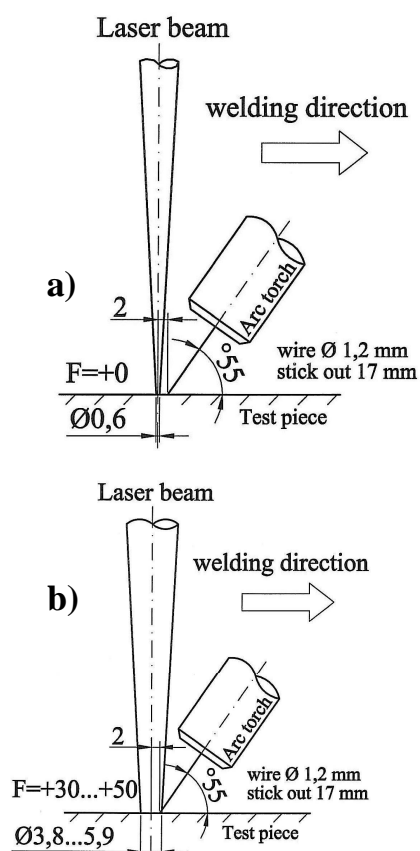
Set-up used in hybrid welding: a) Key-hole mode in welding of root pass and b) Conduction limited mode in welding of filling passes.
